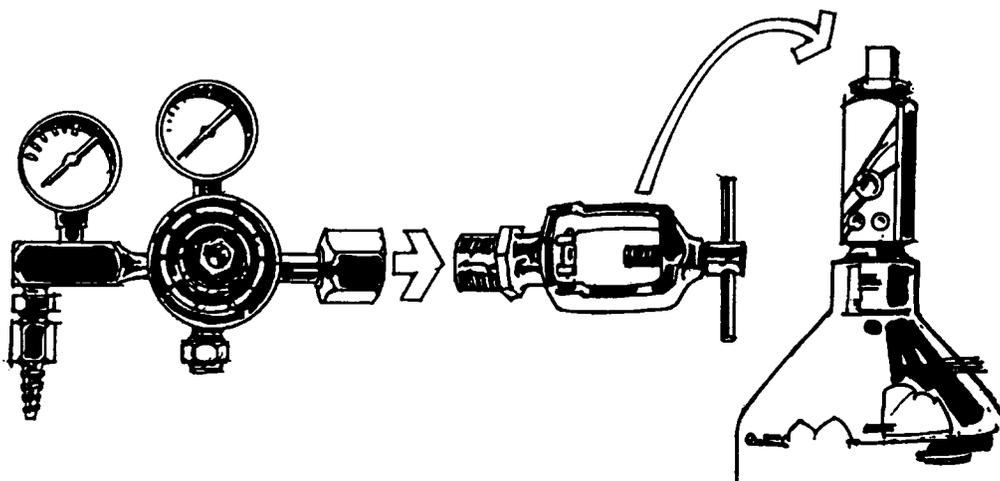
Assembly of (left to right) 540-thread regulator, adaptor yoke for connecting pin-indexed medical post to 540-thread regulator, and medical-oxygen cylinder.
